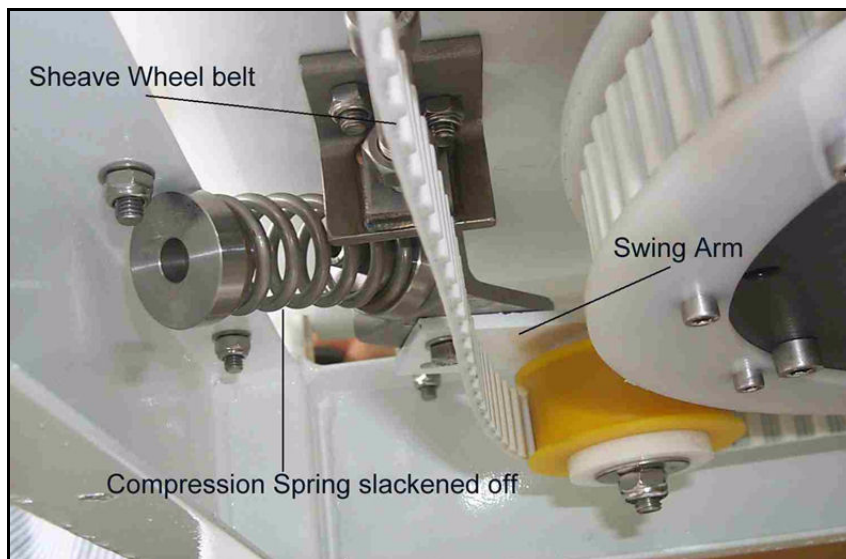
Sheave Wheel Belt Slackened Off for Removal
